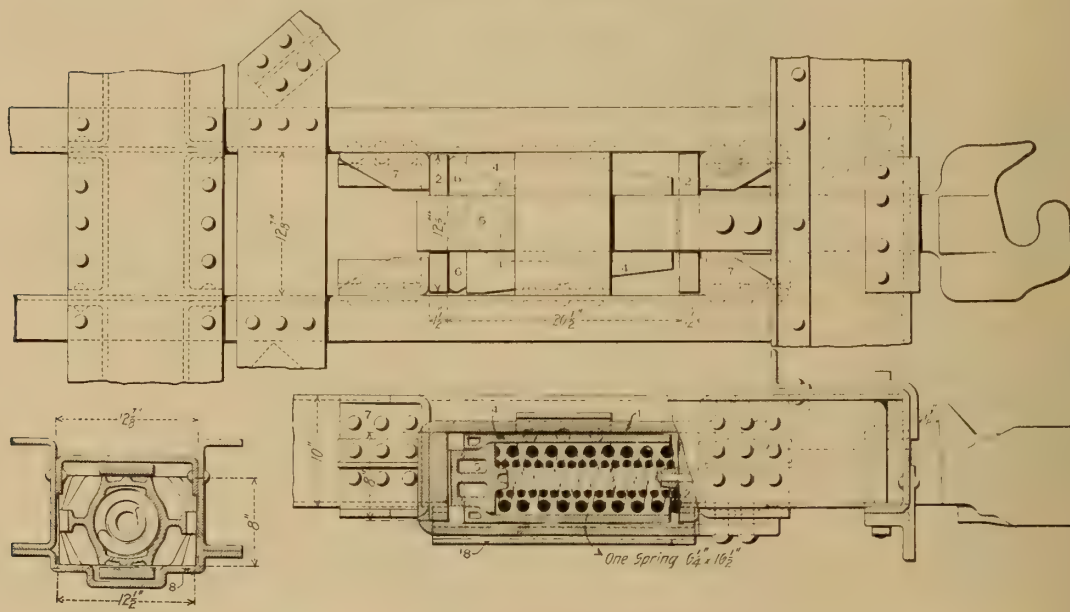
ATTACHMENT OF WESTINGHOUSE FRICTION DRAFT GEAR TO CARS WITH METAL SILLS. WESTINGHOUSE AIR BRAKE CO.
